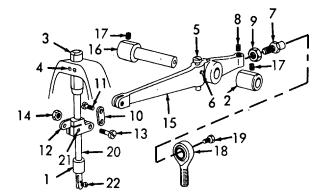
Needle Bar Drive Mechanism, Installation.
